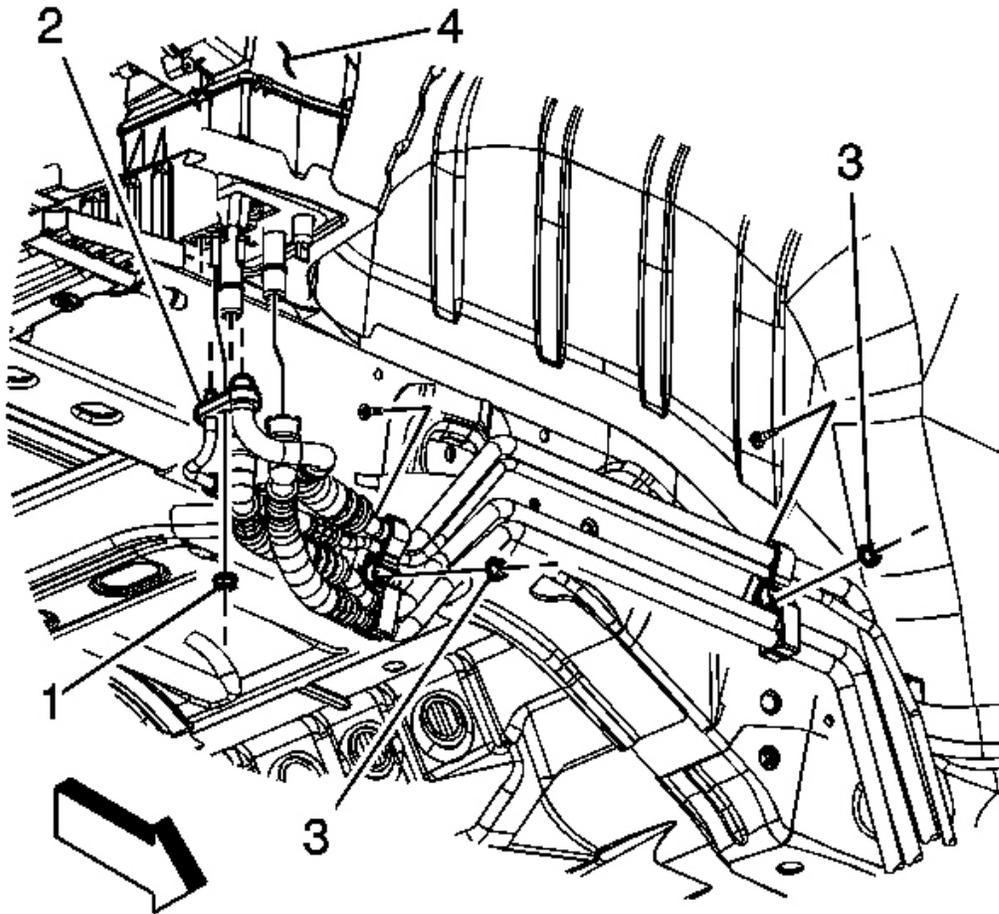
Locating Auxiliary A/C Evaporator Tubes, HVAC Module & Retaining Nut
